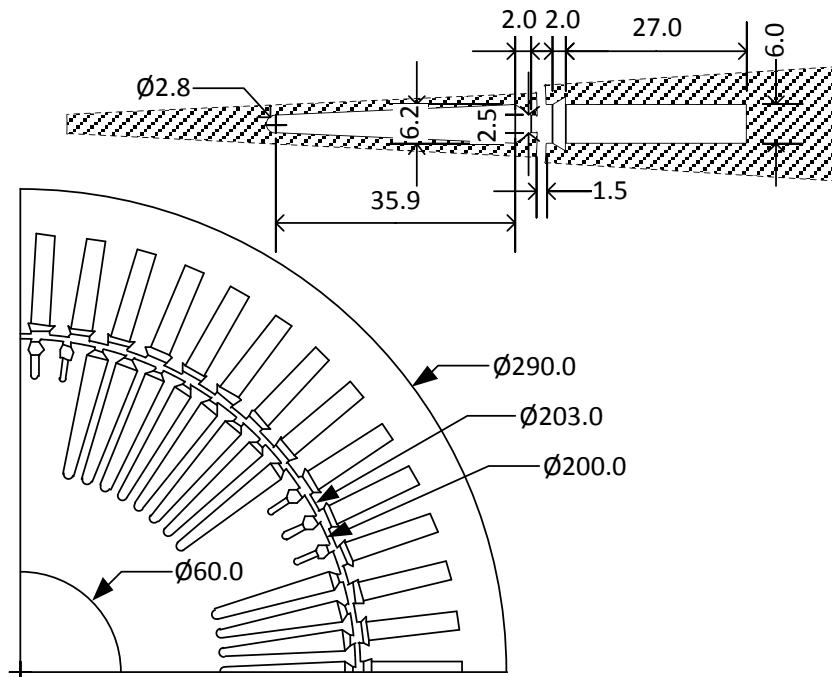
The rotor dimensions of the main generator of BSG designed at the first step - haies MEGEVE generator is taken as references machine
